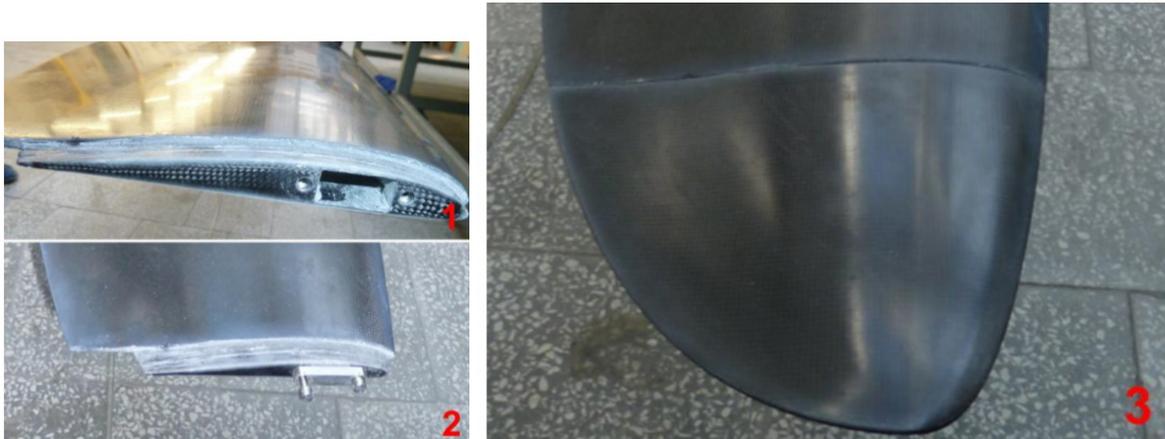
Important elements of blades tip (1) for fixing the insert hole for balancing chamber, (2) balancing chamber placed into blade (3) the composite tip of the blade
